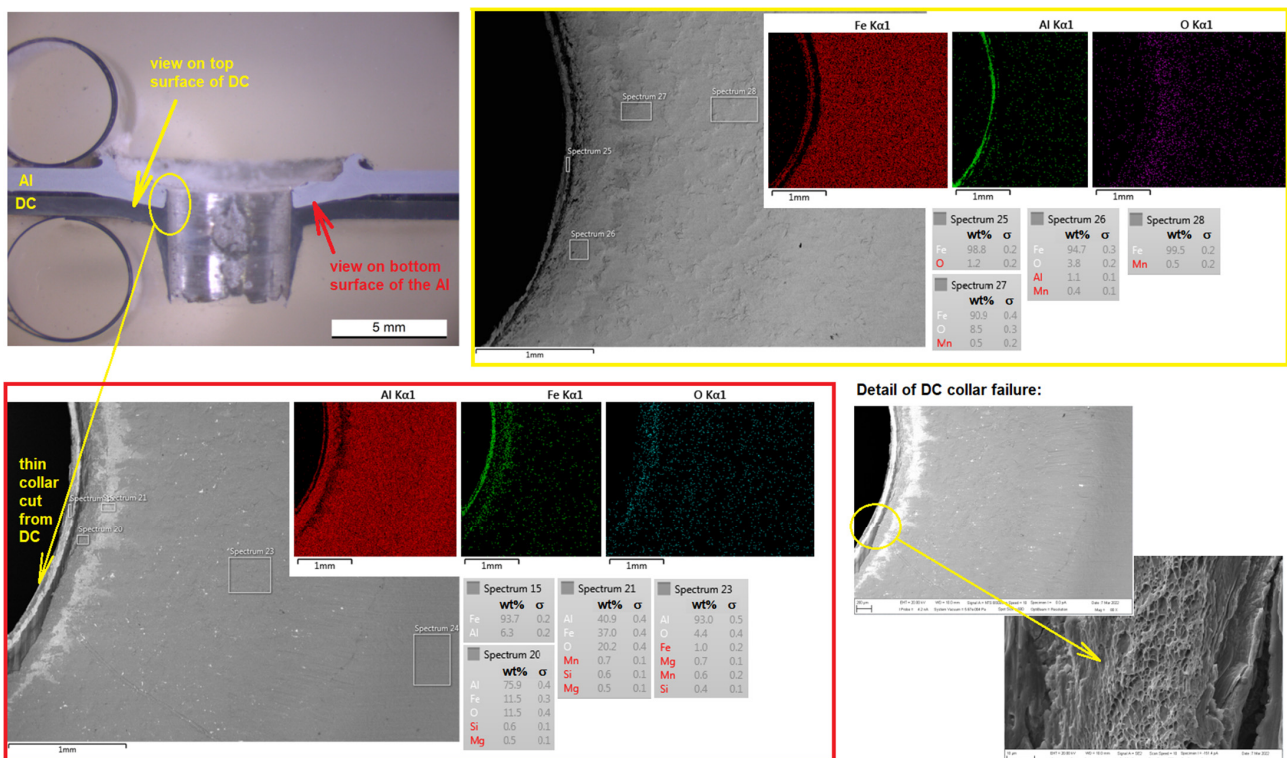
SEM analysis of Al-DC joint, element maps, EDS spectra, and fracture surfaces of bushing. The yellow border contains a detailed view on the top surface of the lower material. The red border contains a detailed view on the bottom surface of the upper material.
